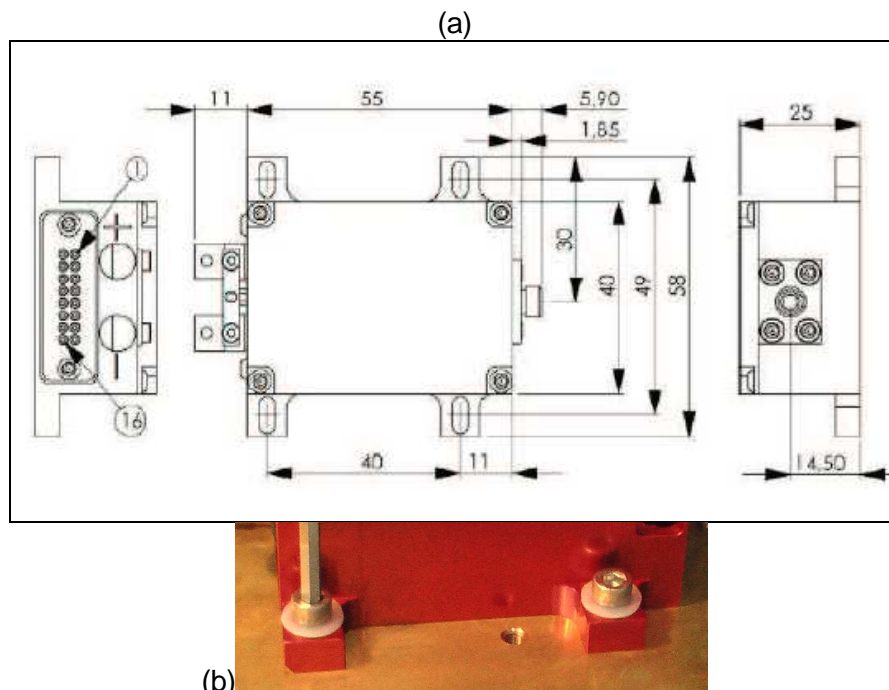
(a): mechanical drawing, which shows the mounting 4 wholes: 40 x 49 mm
